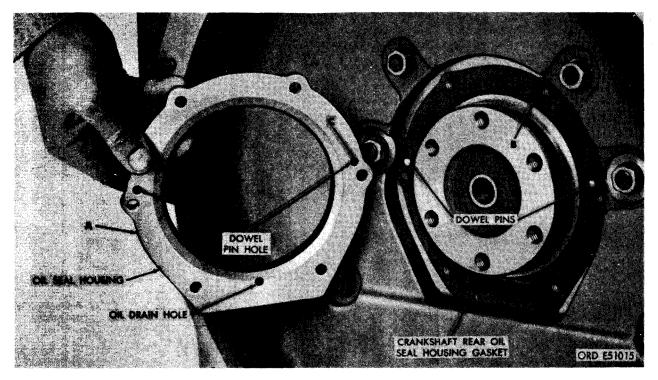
REMOVING AND INSTALLING CRANKSHAFT REAR OIL SEAL AND HOUSING ASSEMBLY AND GASKET.
